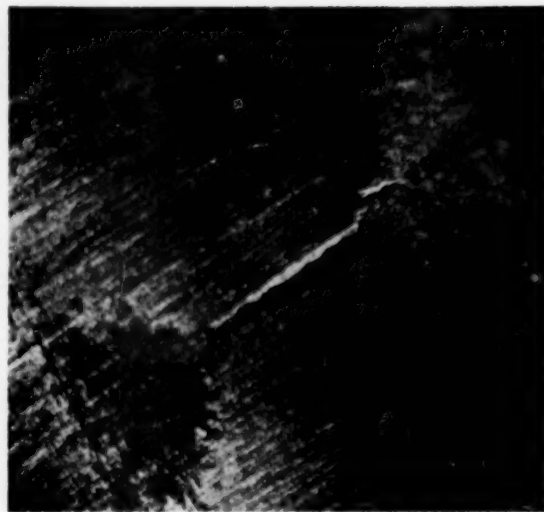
MAGNIFIED VIEW OF FATIGUE CRACK IN NO. 347 STAINLESS STEEL
